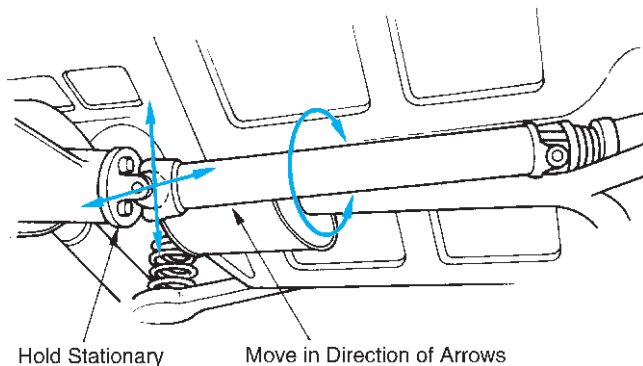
When checking a U-joint, hold one yoke so that it will not move and try to rotate the other yoke and move it in a direction that is parallel to the legs of the cross; any perceptible motion indicates a worn joint. (Courtesy of Ford Motor Company)
